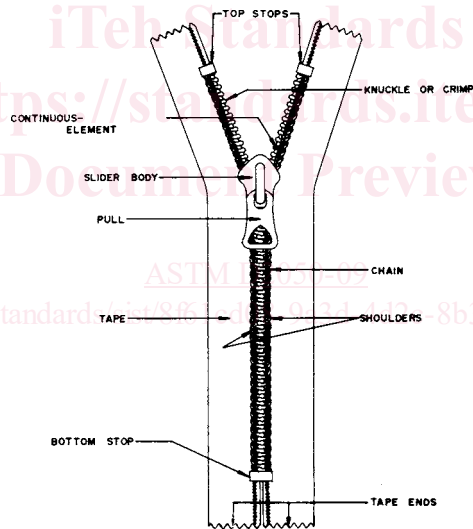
Principle Parts of Slide Fasteners—Continuous Element Slide Fastener
